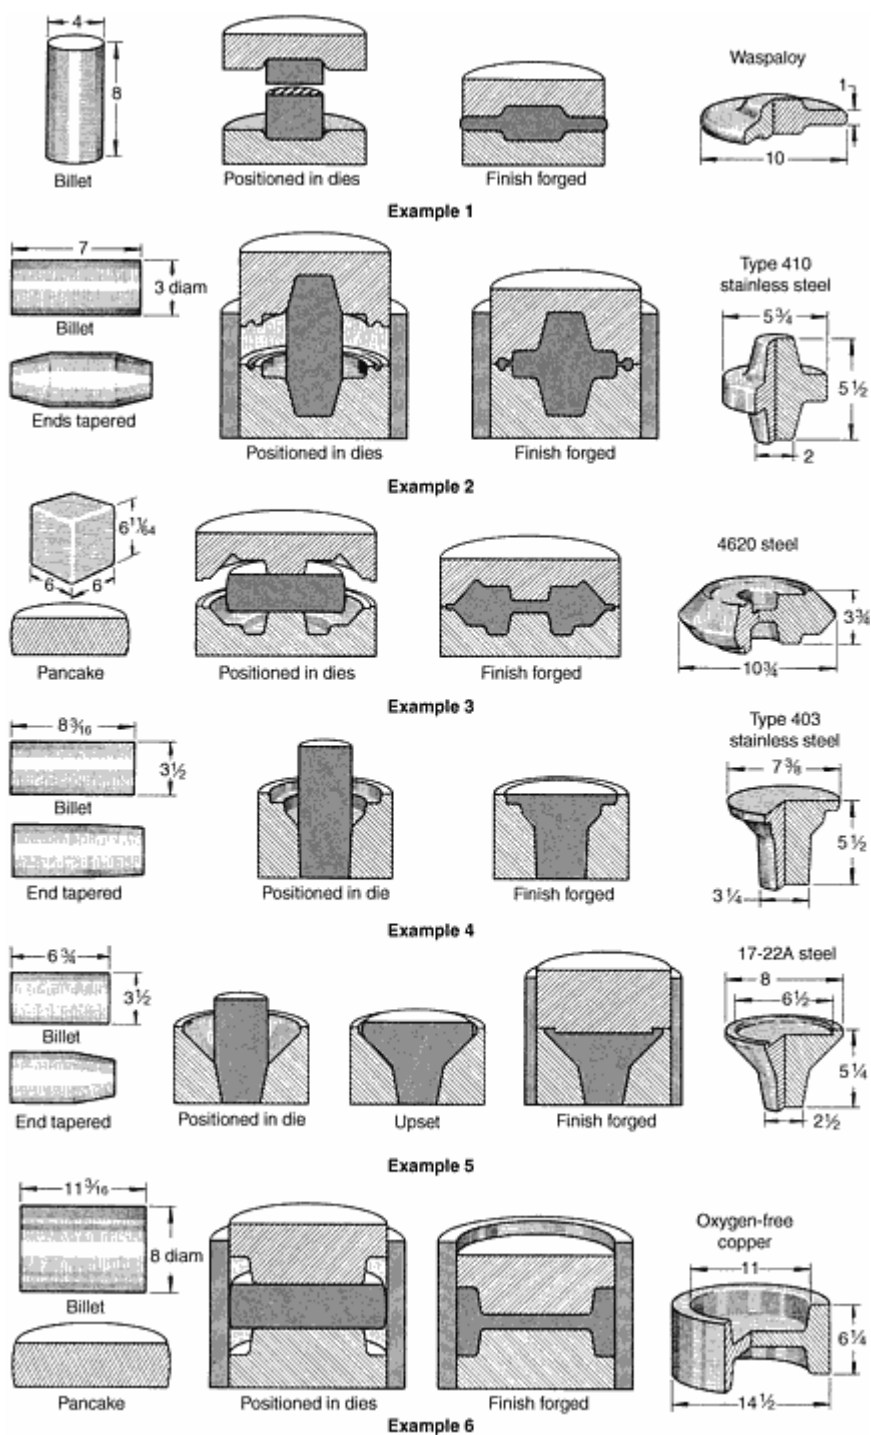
Production of six blocker-type forgings with loose tooling in hammers. Dimensions are in inches.
